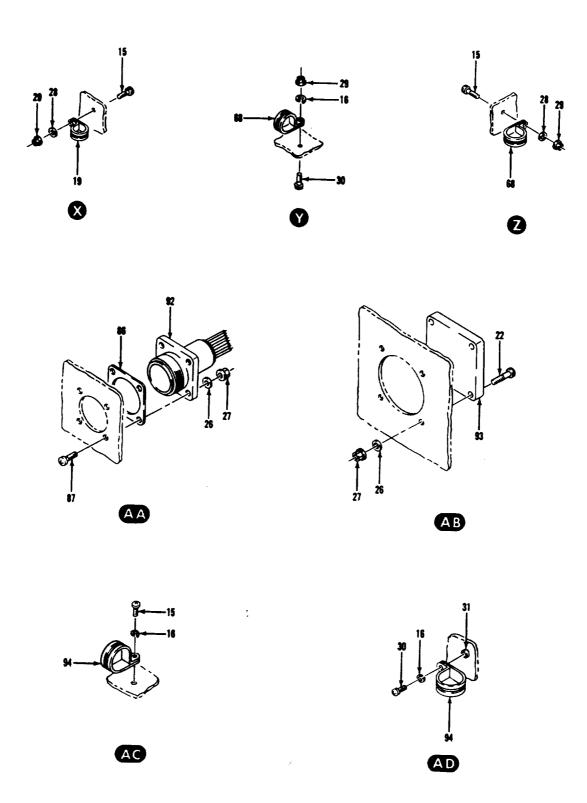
Electrical Equipment Installation (Sheet 9 of 19)
